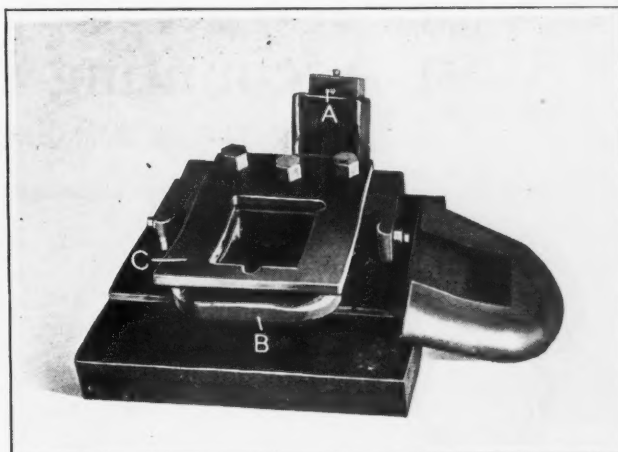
Die and Punch used to cut out a Section in one Wall of the Broom-holder Shell and pierce a Small Square Locking Hole
